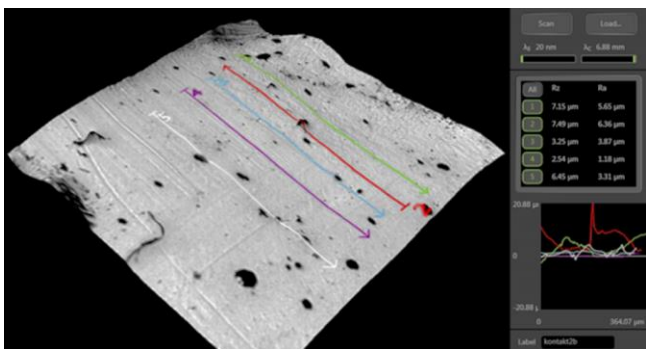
Sample number 2, measurement 2 – 3D view of the test surface
